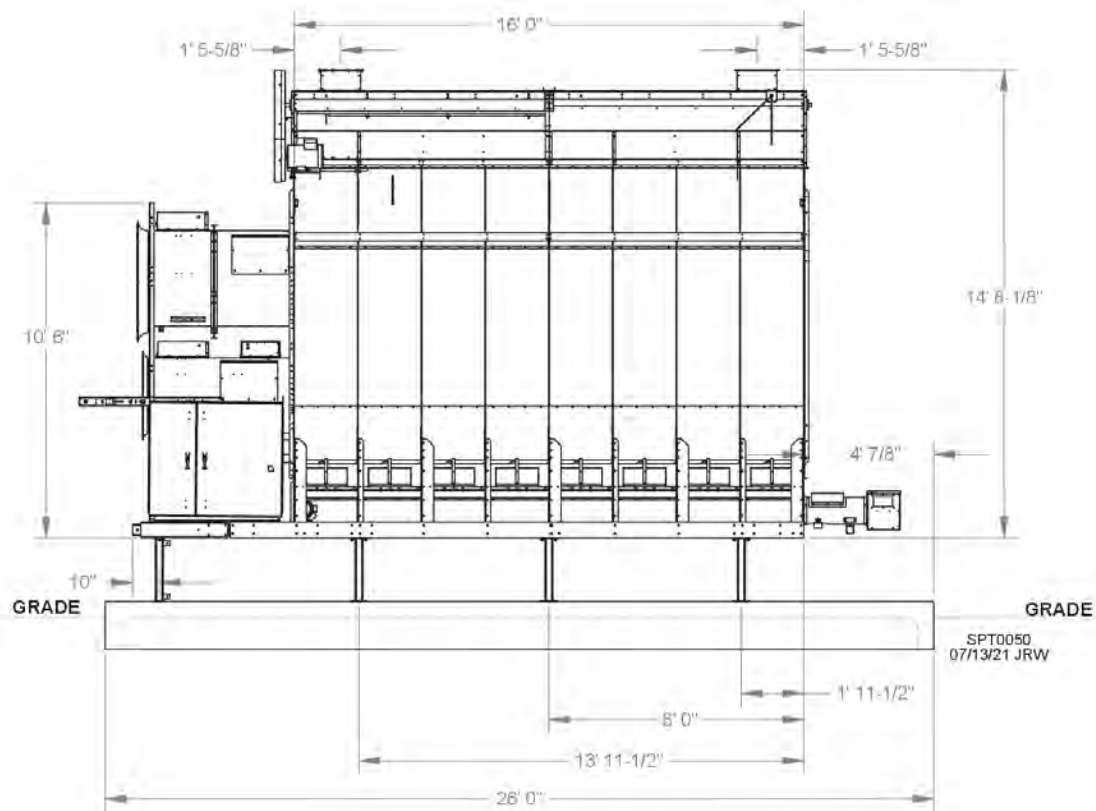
Leg locations & dimensions for 16' axial dryer
